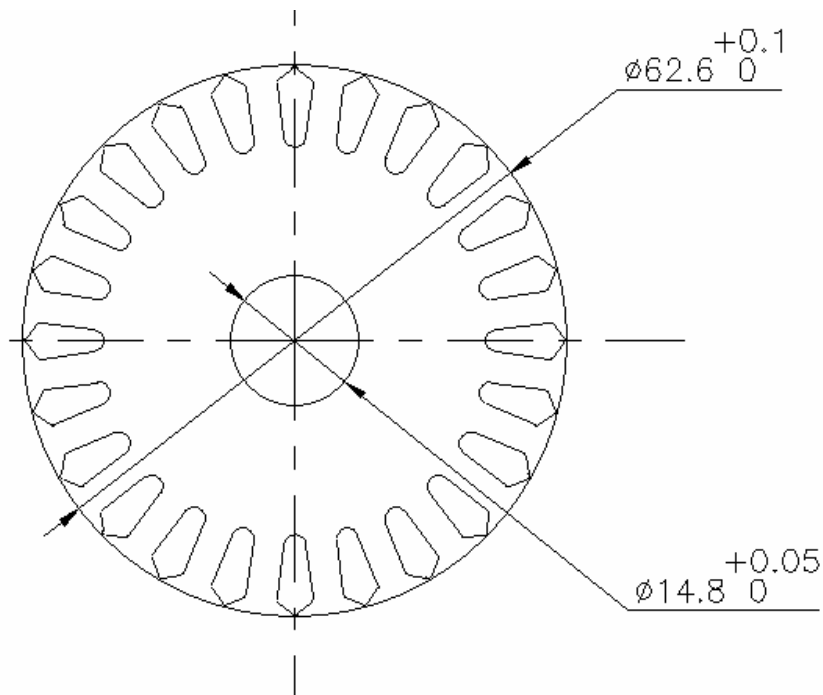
Cross-section of 24 bar rotor (unskewed rotor)
